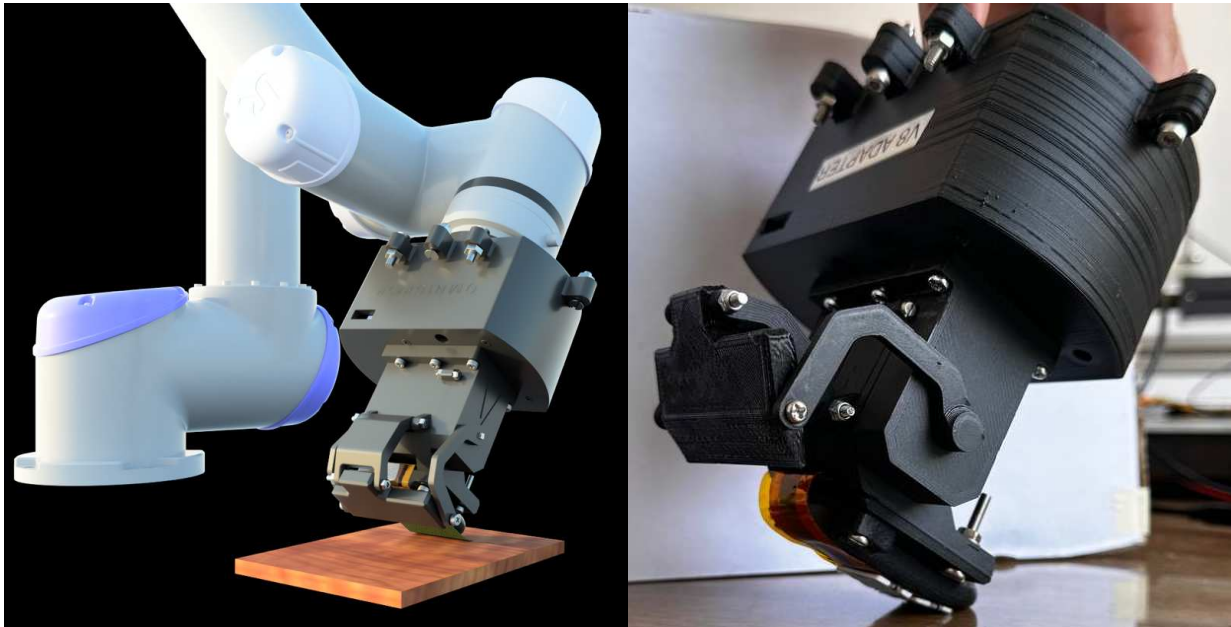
Gripper for fabric. Whole design. CAD (left) and prototype (right)
